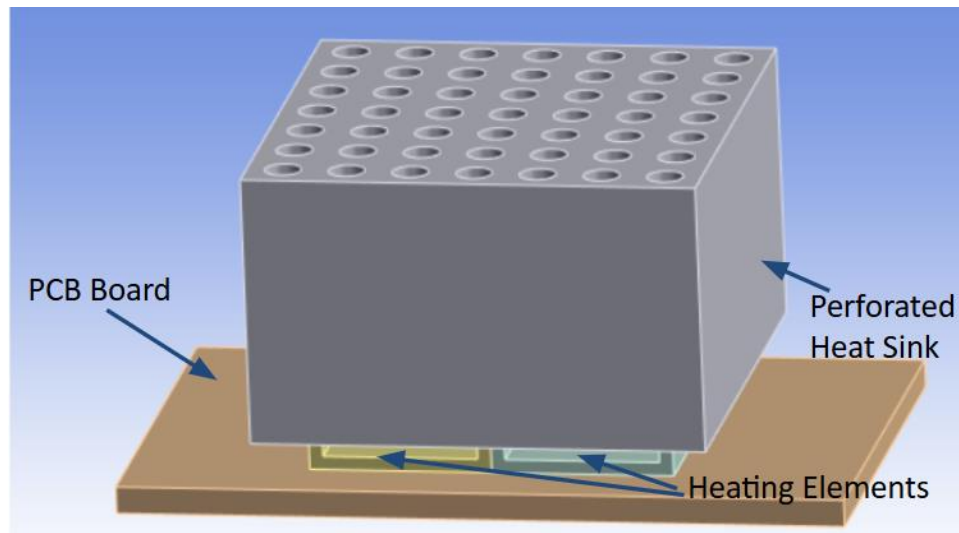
CAD assembly including the heat sink geometry with perforations, heating elements and PCB base
